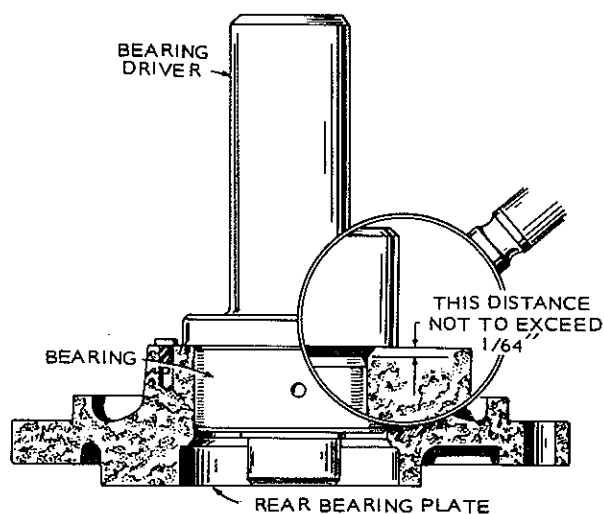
REAR BEARING PLATE BEARING INSTALLATION
